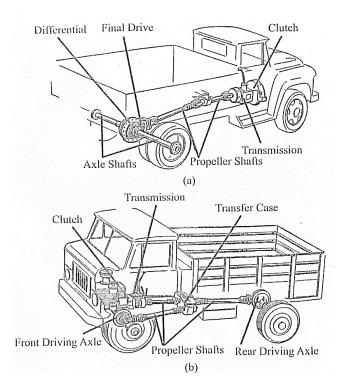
Drive Line of Automobile: (a) With One Driving Axle; (b) With Two Driving Axles.
